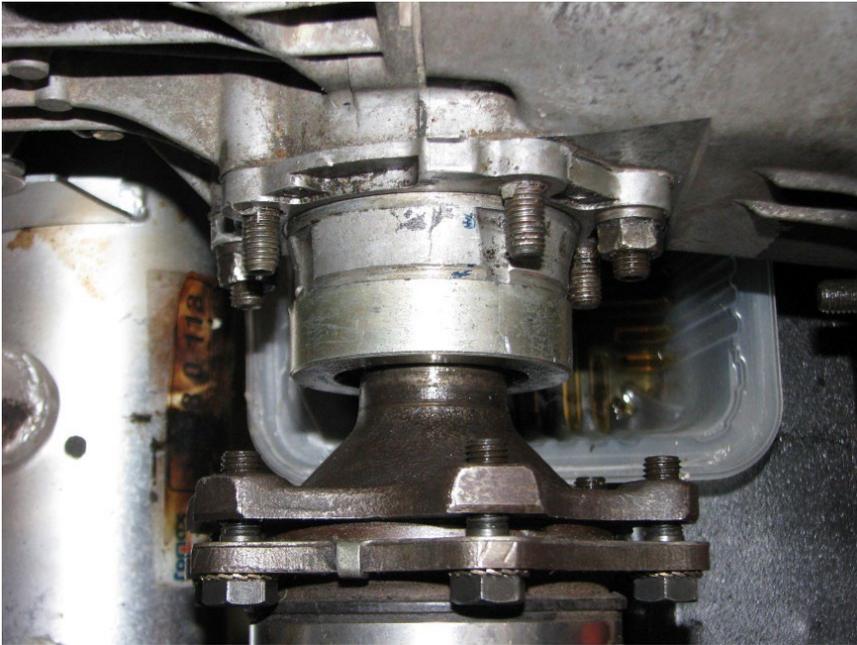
Another view of the gearbox output hub, showing the hub and its mounting flange which is held on the gearbox by six studs, nuts and star washers. A thin paper gasket (with gasket sealant on *both* sides) fits between the hub mounting flange and the gearbox face. The excess gasket sealant is shown in orange at the upper part of the photo.
